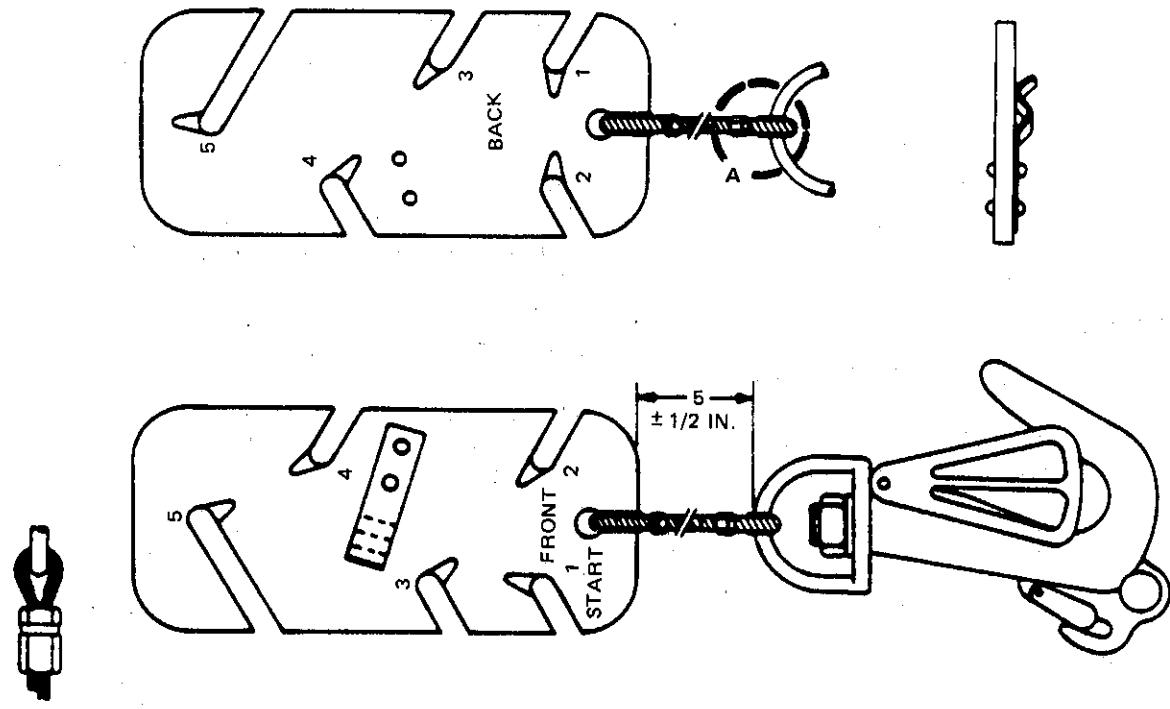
Rescue Hoist Cable Quick Splice Plate Assembly
